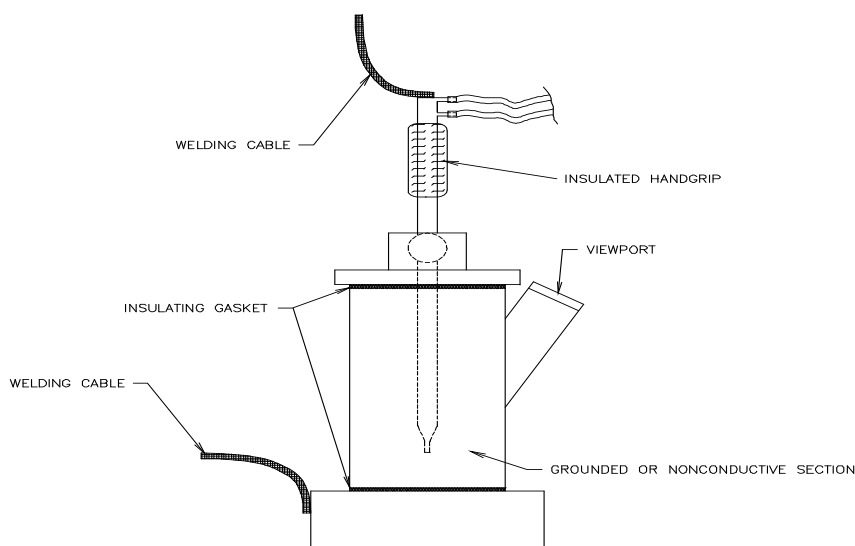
ARC MELTER WITH GROUNDED ISOLATED SECTION
